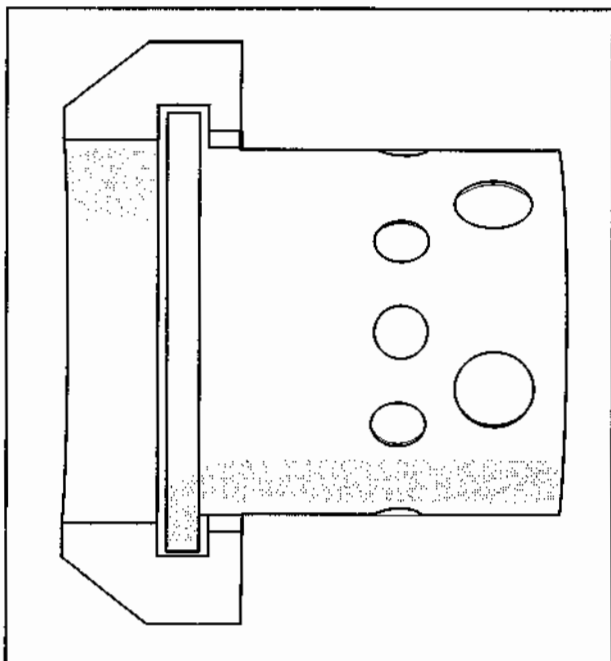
In a splined shaft installation, a retaining nut threads onto the end of the splined shaft and presses against the front cone to hold the propeller in place.
